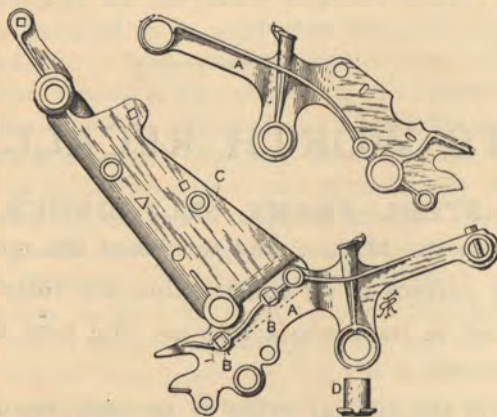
The Osborne Quick Detachable Sheaf Carrier.
